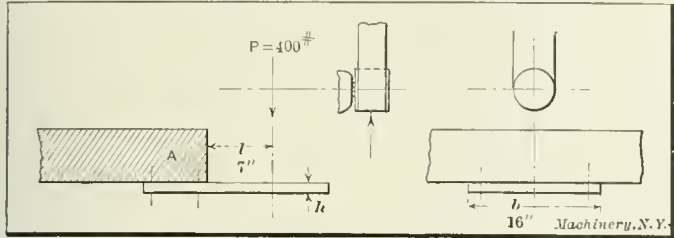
Plain Sheet-steel Motor Support, Upward Belt Pull
